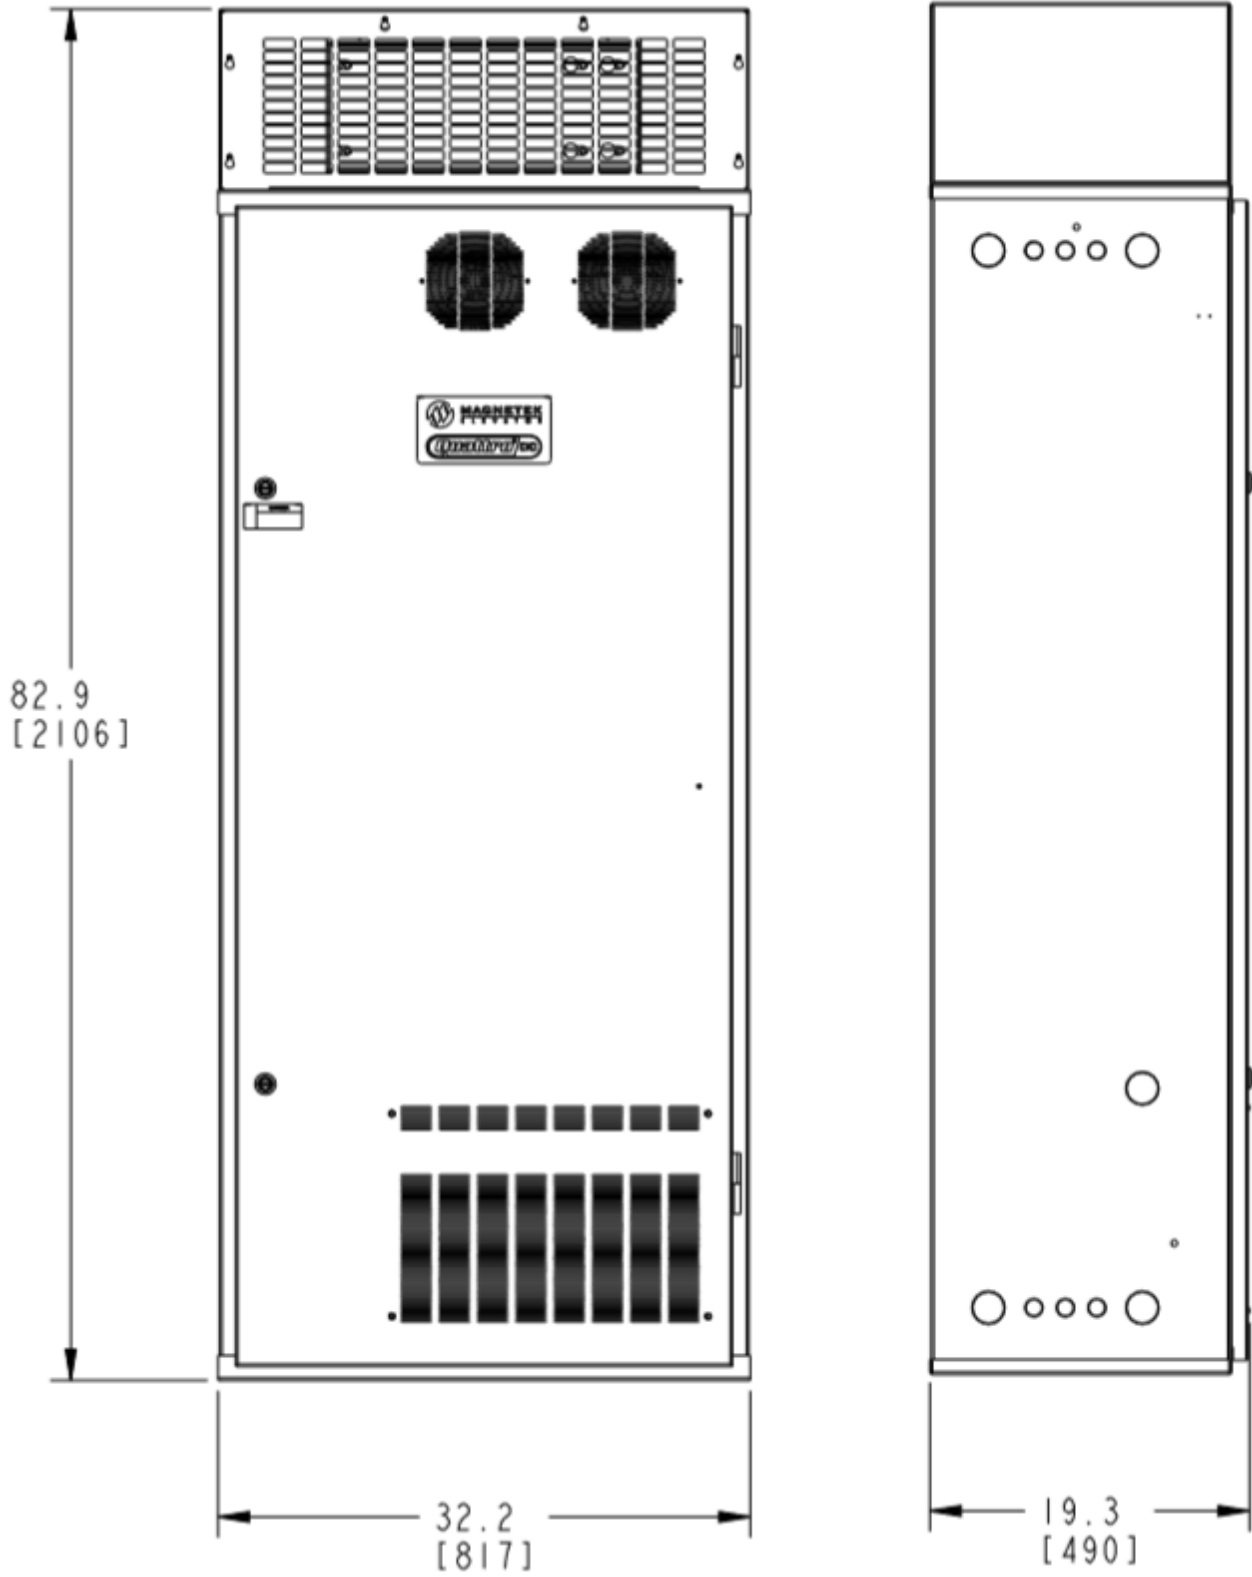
Dimensions with optional Customer I/O Panel includes Top Hat
